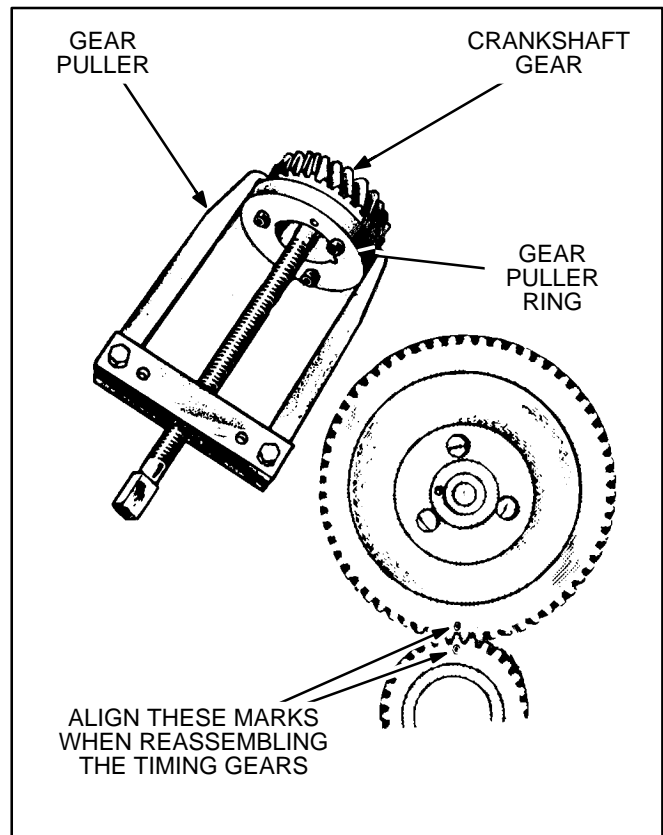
TIMING GEAR REMOVAL AND INSTALLATION
